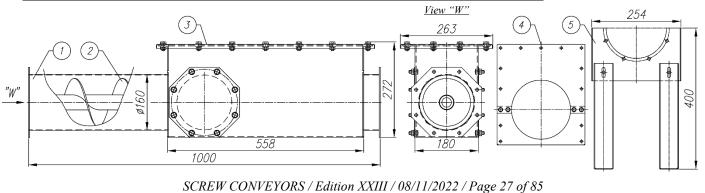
PS160-LOZ/P1-a screw conveyor of Ø160 mm – intermediate polyamide bearing.
